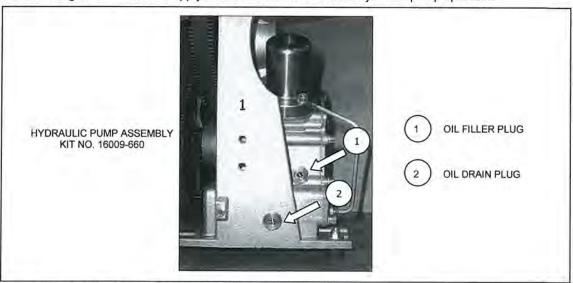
RIGHT SIDE OF THE HYDRAULIC PUMP
